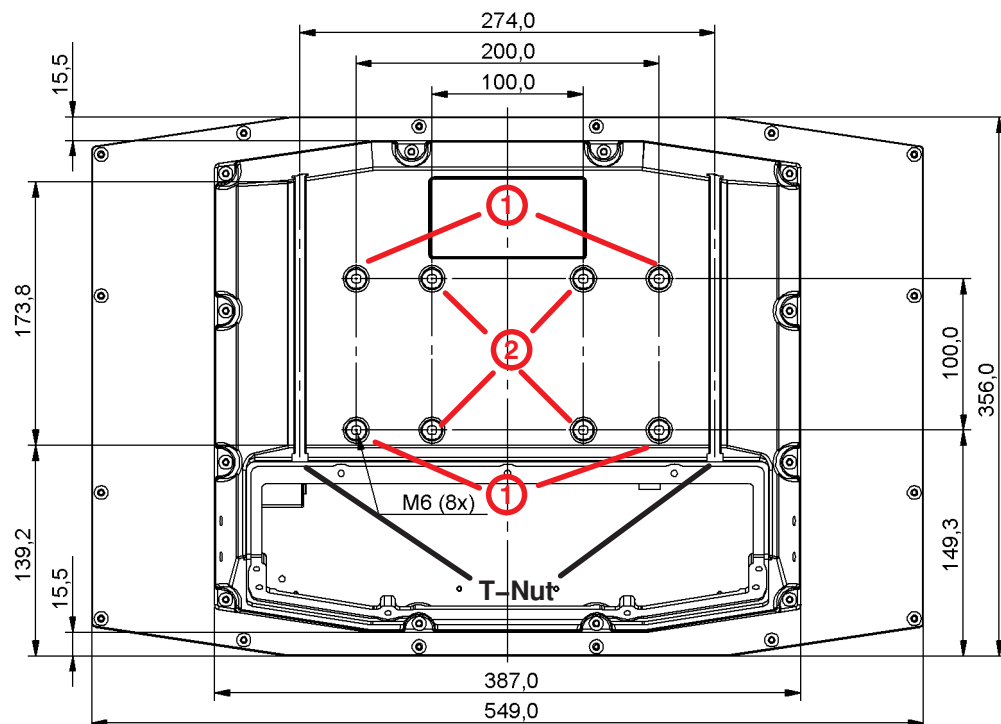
Back, C21 enclosure (all dimensions in mm)
